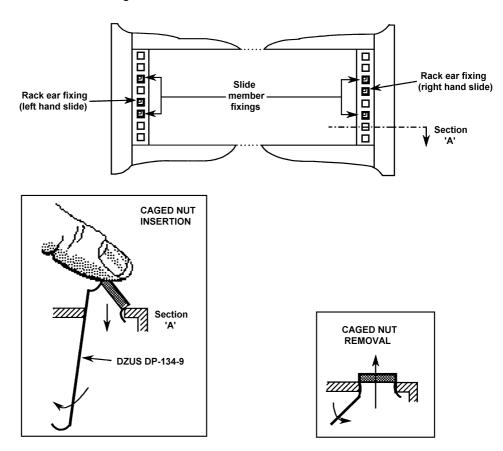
Caged nut insertion in Imrak Series 80 (and similar) cabinets.
